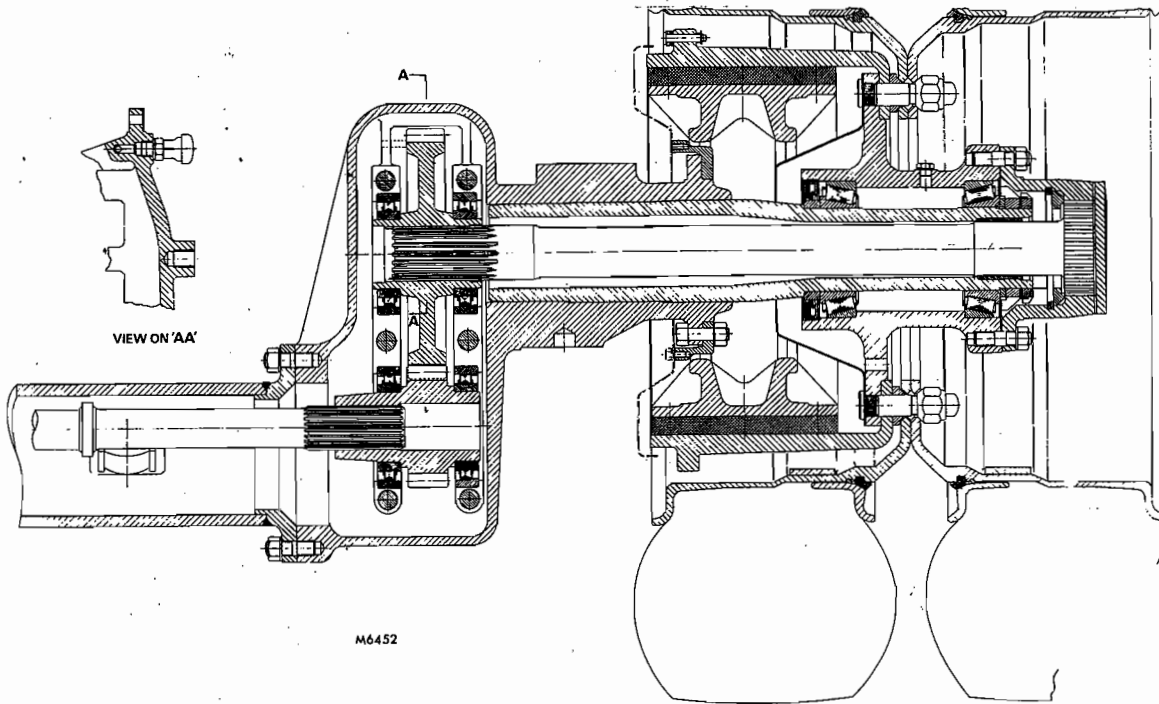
SECTION THROUGH AXLE—NEAR SIDE
